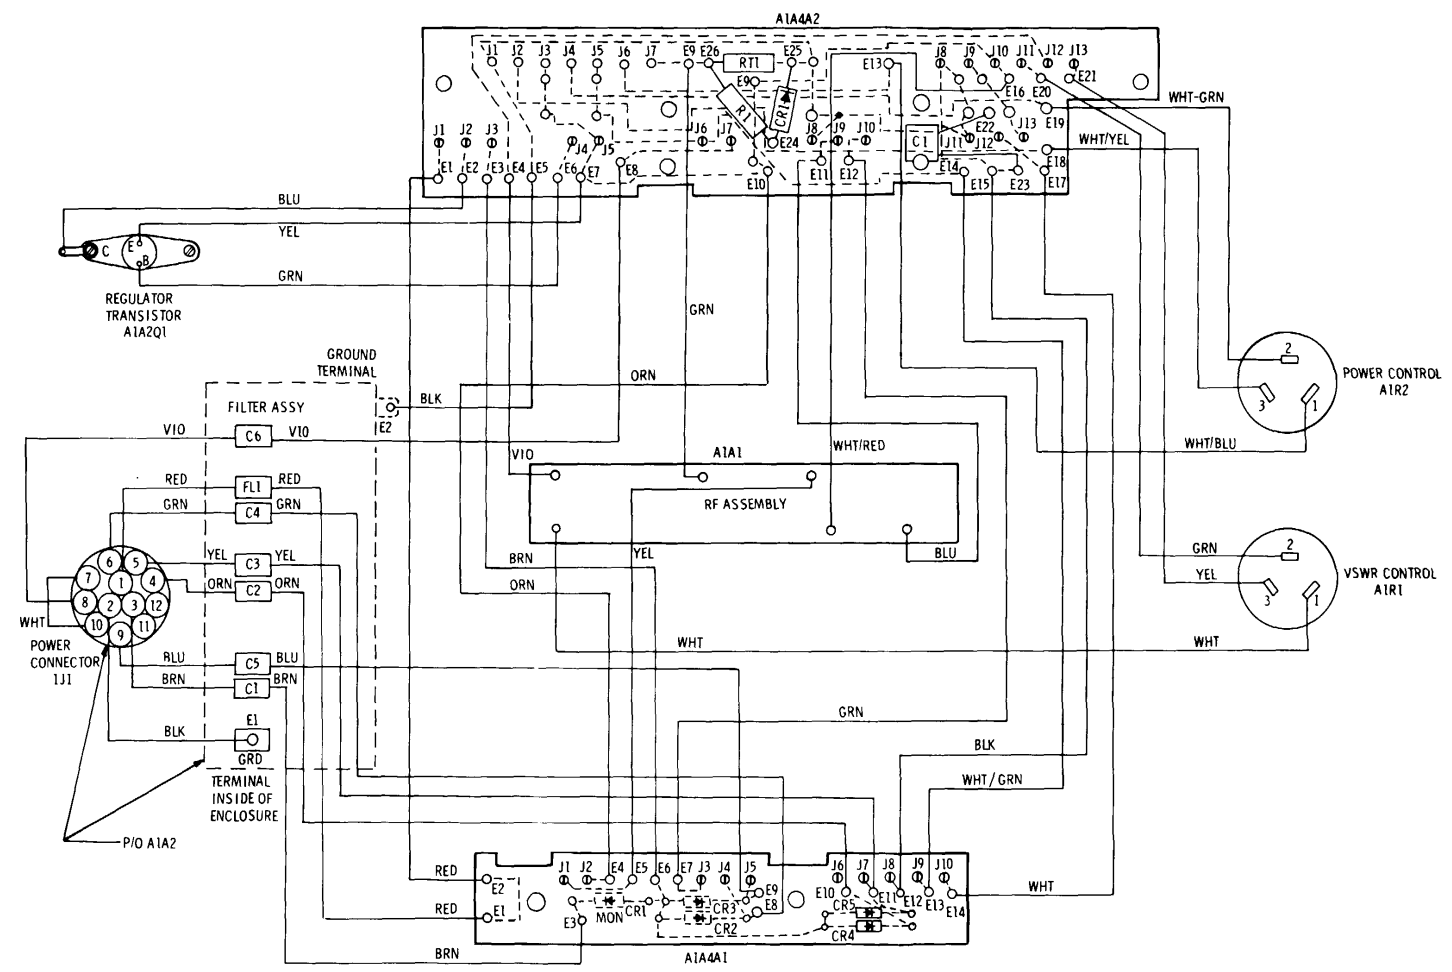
Main Frame Assembly (A1), Wiring Diagram
